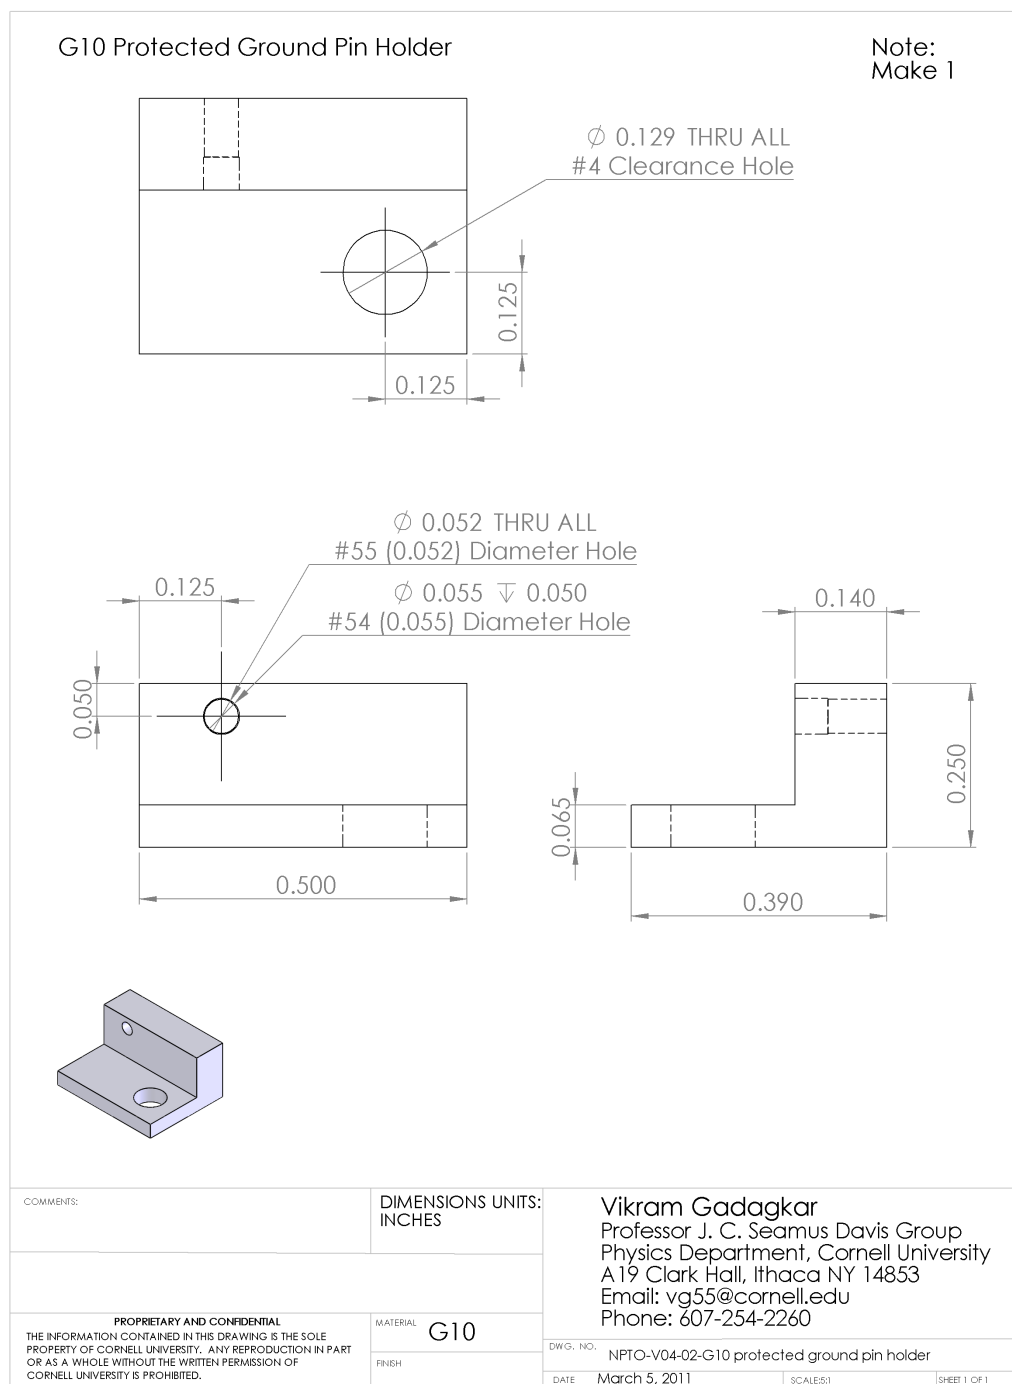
G10 protected ground pin holder. This holder gets mounted on the aluminum electrode platform and holds a receptacle that accepts a pin to which one end of a thin gold wire is attached using silver epoxy. The other end of the wire is attached to the magnesium capacitor electrode plate on the torsional oscillator.
